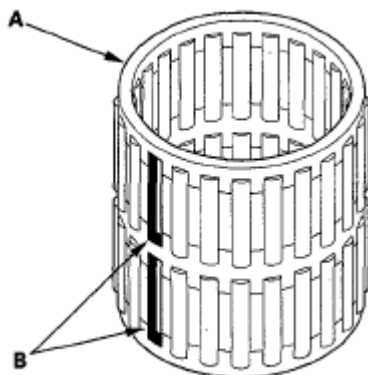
Identifying No-Roller Cavities Of Needle Bearing
